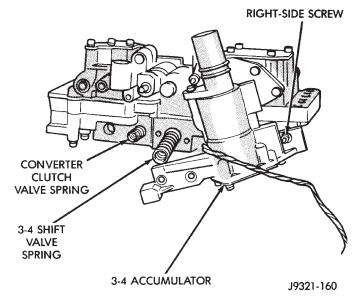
Converter Clutch And 3-4 Shift Valve Springs
